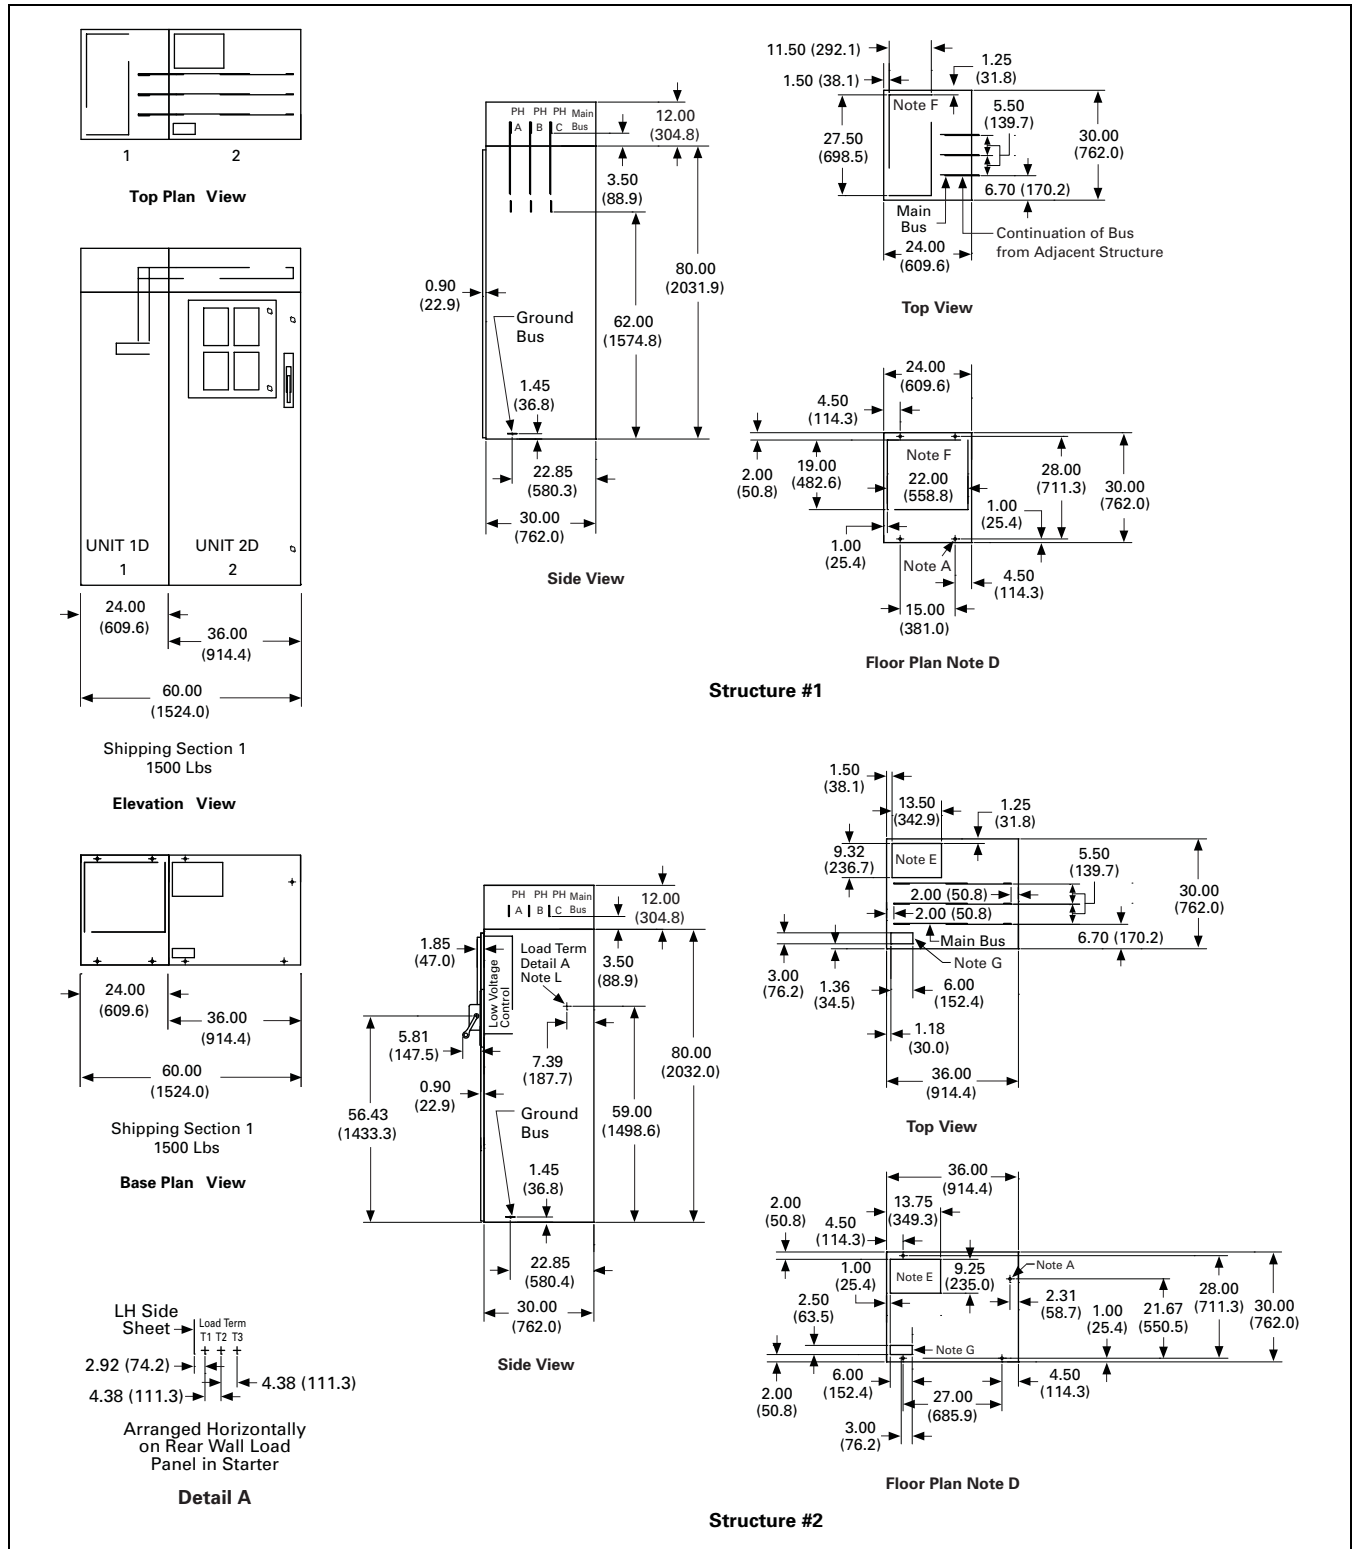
Arrangement 1 Detail (Full Voltage 15 kV)—See Table 10.1-27 on Page 10.1-37 for Notes
